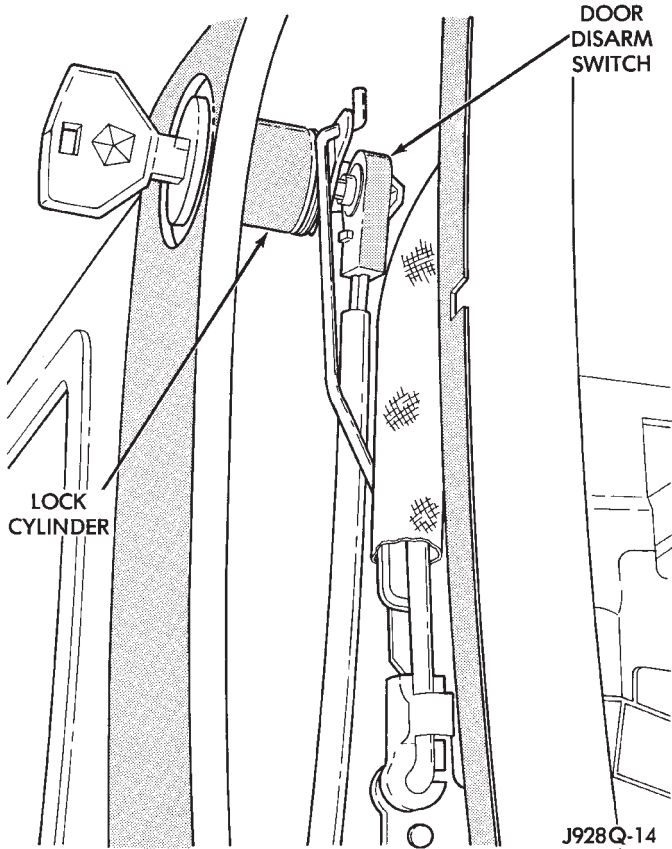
Door Lock Cylinder Switch Remove/Install-Typical
